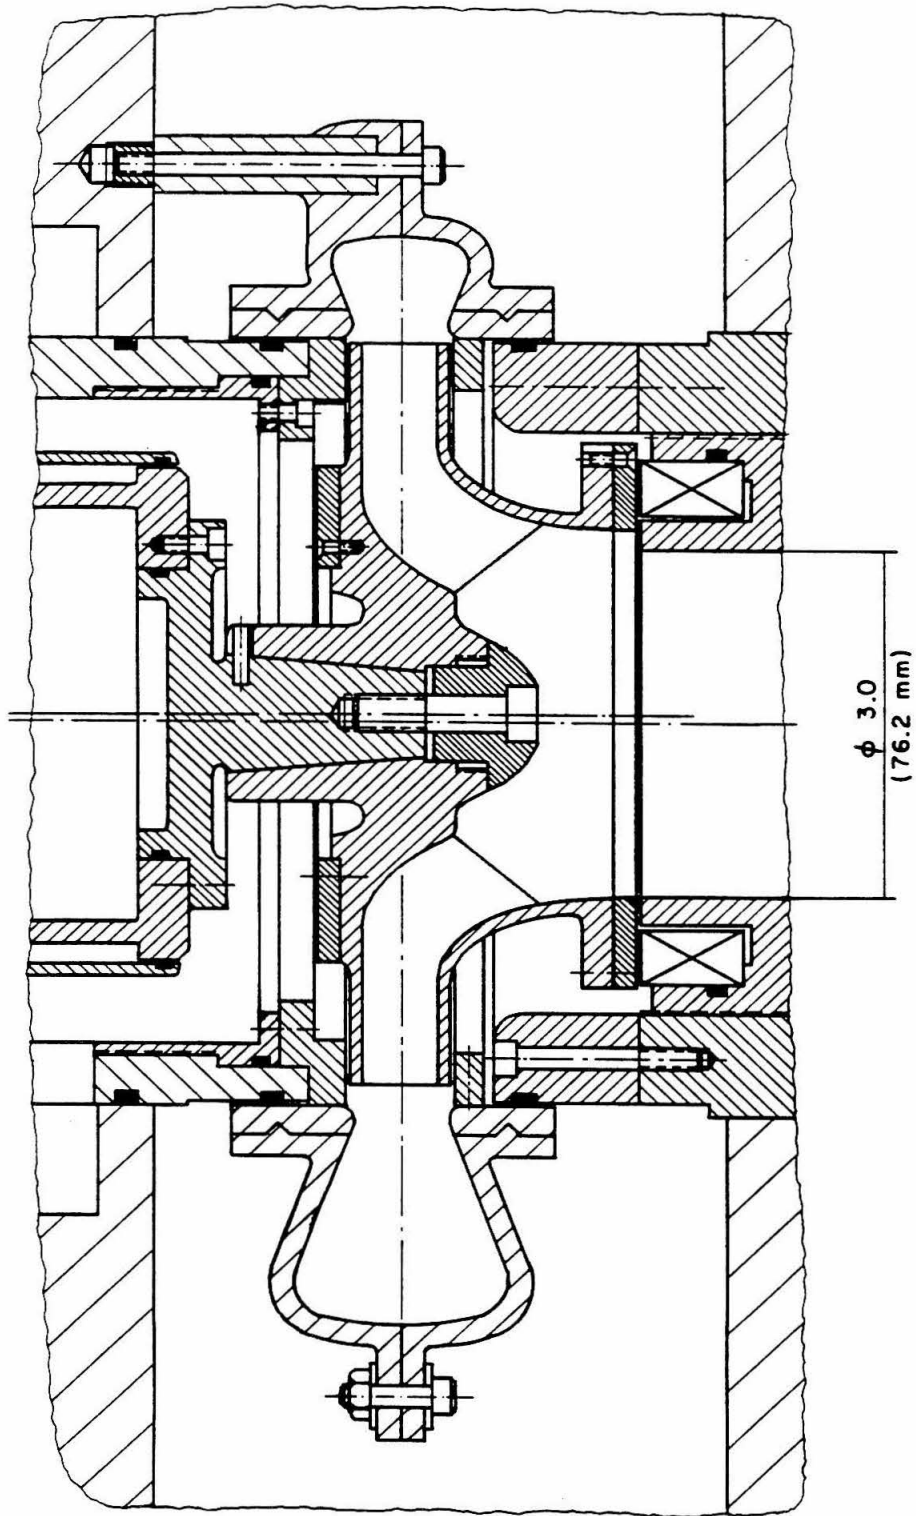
Assembly drawing of Impeller X and Volute A installed in the test section.
